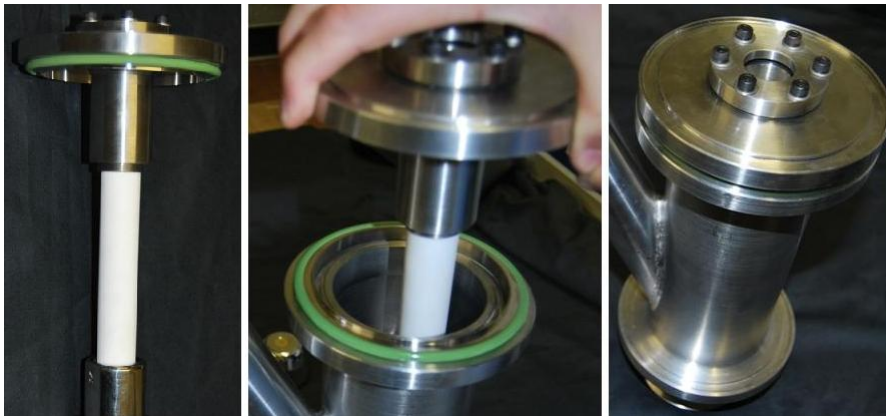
Step 1 - Attaching rear flange and macor tube.
